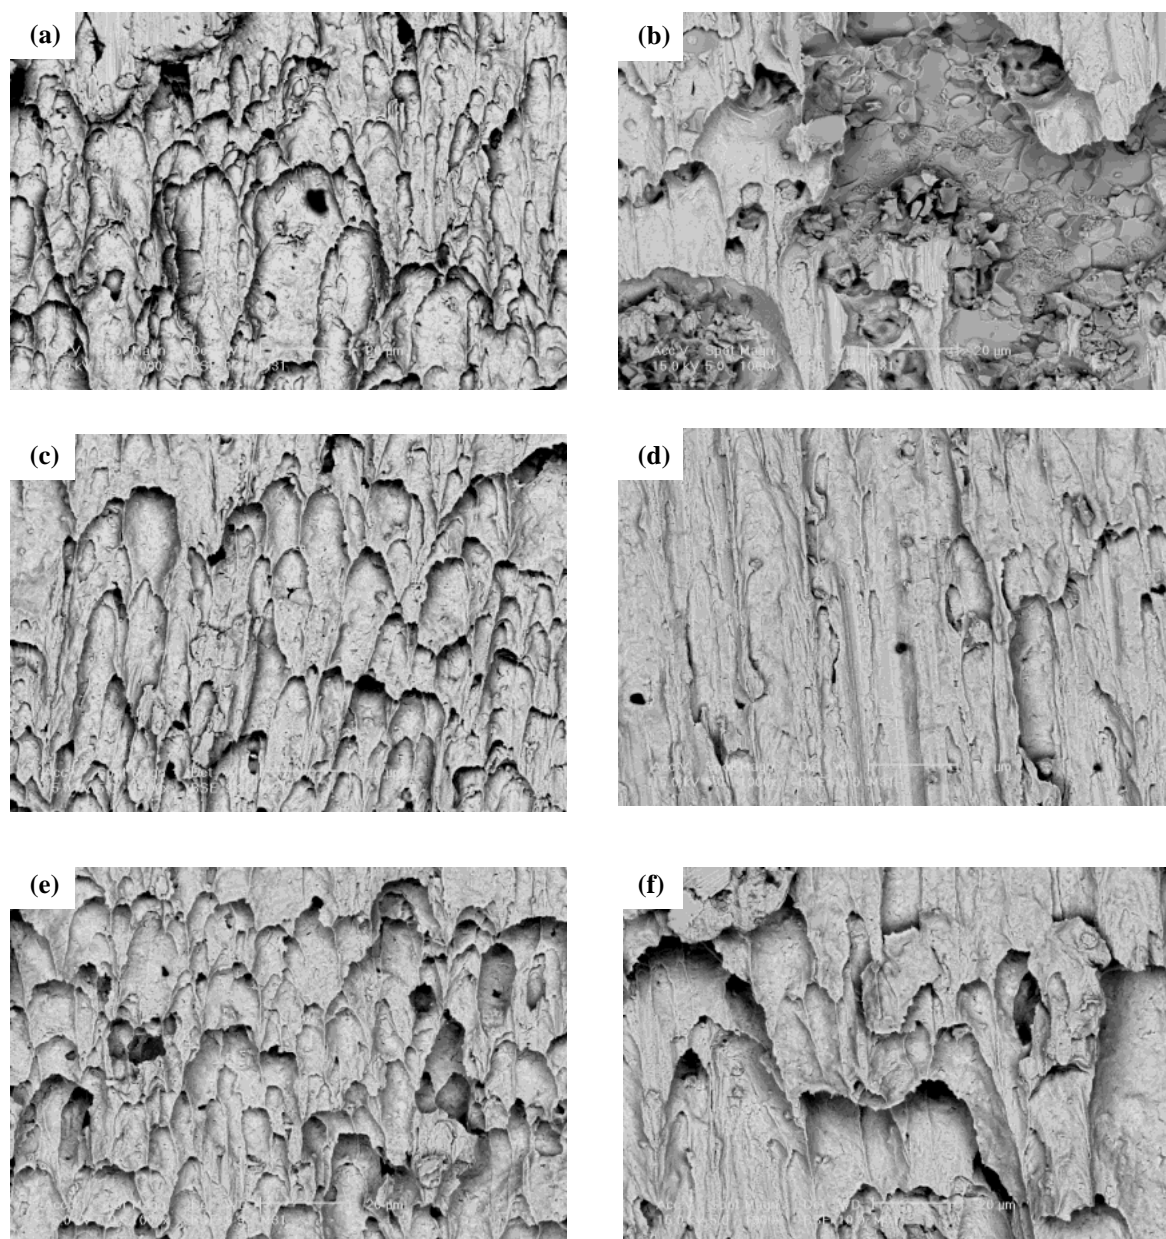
Fracture surface after ball shear test for solder/Cu pad joint (a), (b), solder/electroless Ni-P/Cu pad joint (c), (d), and immersion Au/Ni-P/Cu joint (e), (f): as-soldered (a), (c), and (e) and after aging at 150°C for 100 days (b), (d), and (f).
